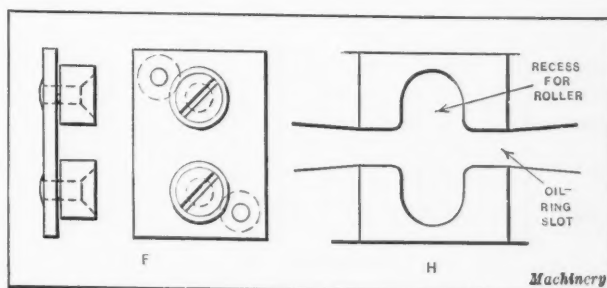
Oil-ring Supporting Rollers and Detail of Ring Groove
